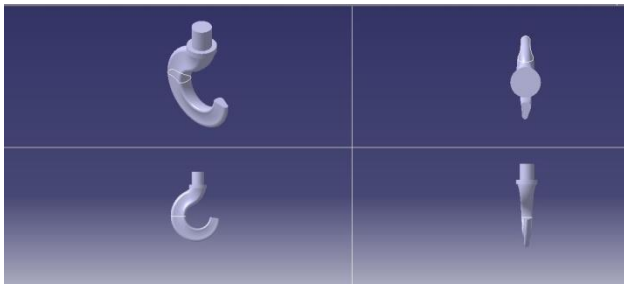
Modeling of EOT crane hook in new modified-2 cross section
